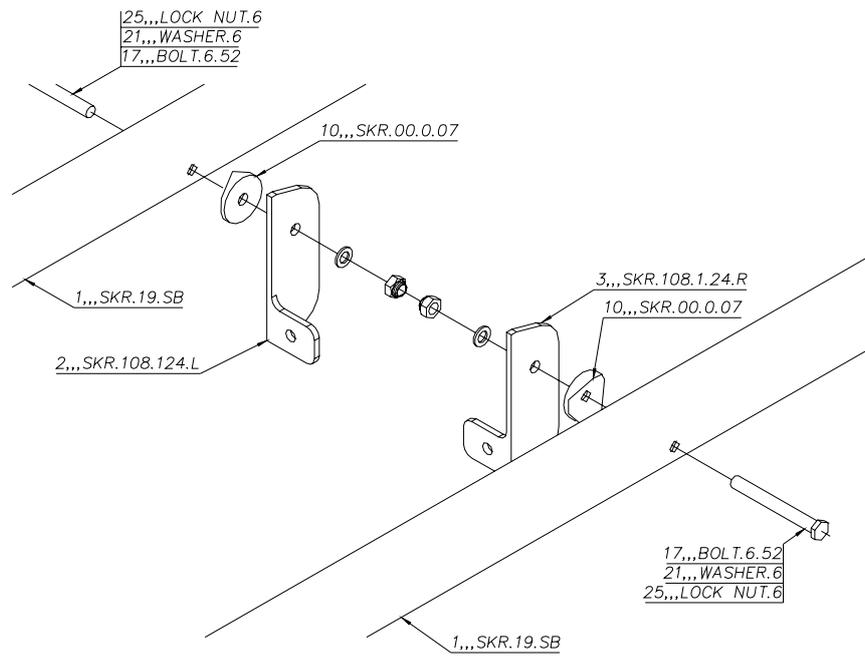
; central bracing pieces. Note the bolts should be the other way around (as shown in photo fig 53).
